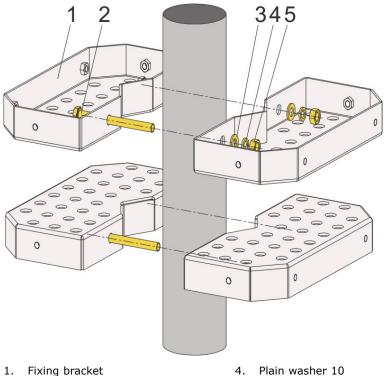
MOUNTING FIXING BRACKET ASSEMBLIES
